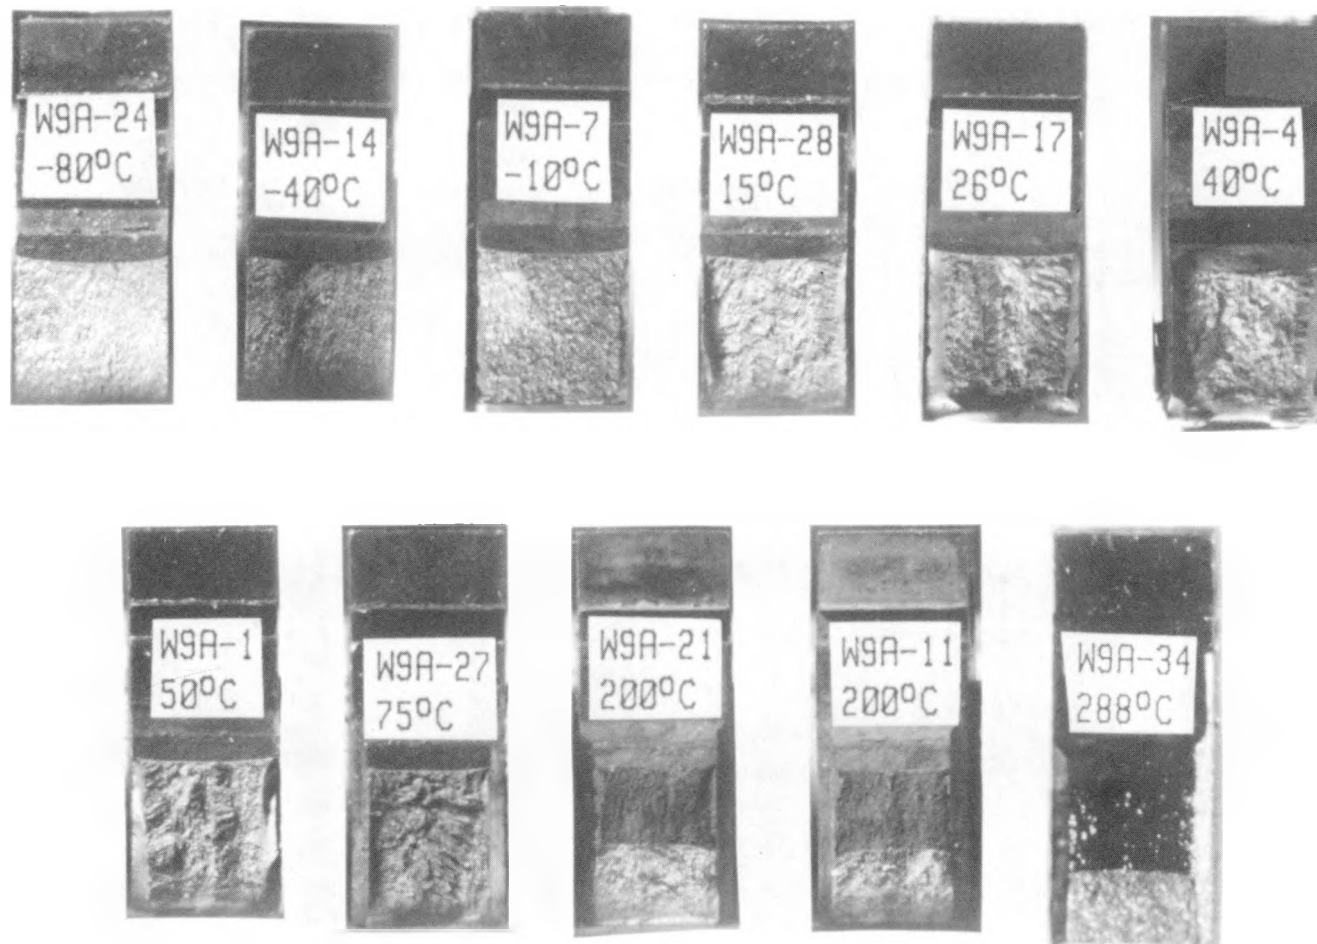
Fracture surfaces for the Linde 0091 weld (W9A), in the I condition to a fluence of $2.1 \times 10^{19} \text{ n/cm}^2$.
